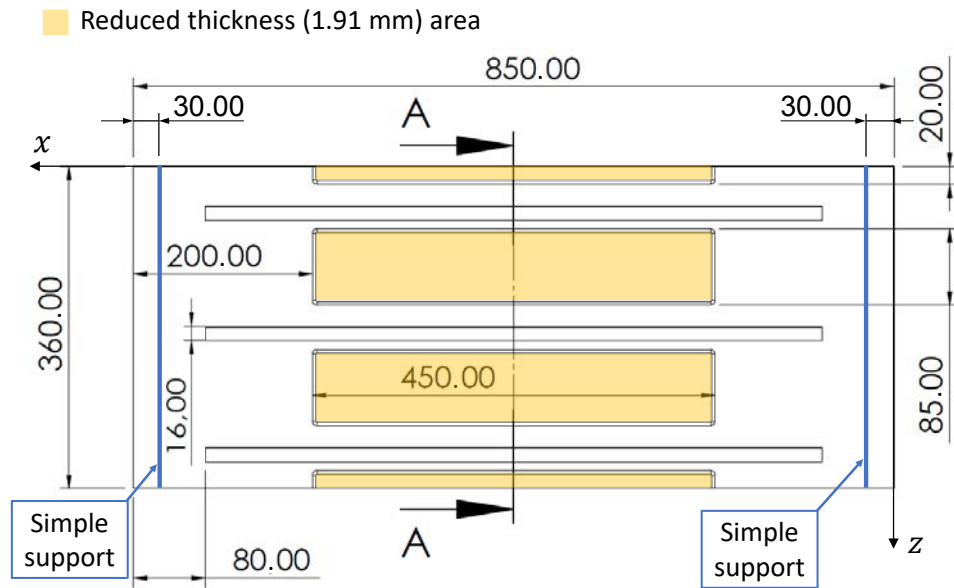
Geometry of the panel - Bottom view of the panel. All dimensions are expressed in mm.
